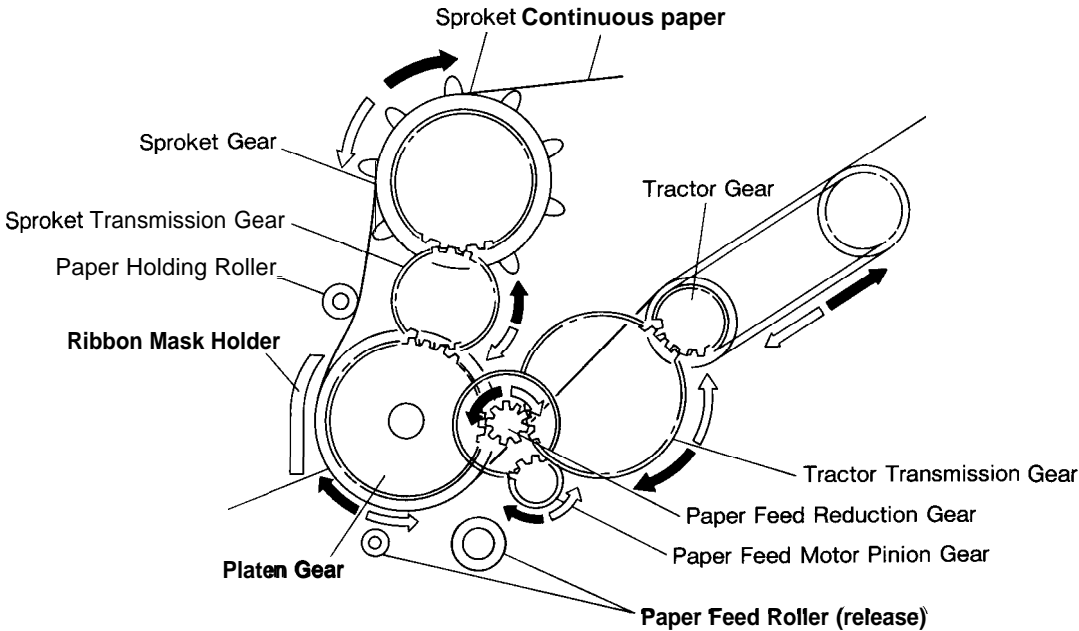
Push-Pull Feeding Gear Arrangement and Paper Path
